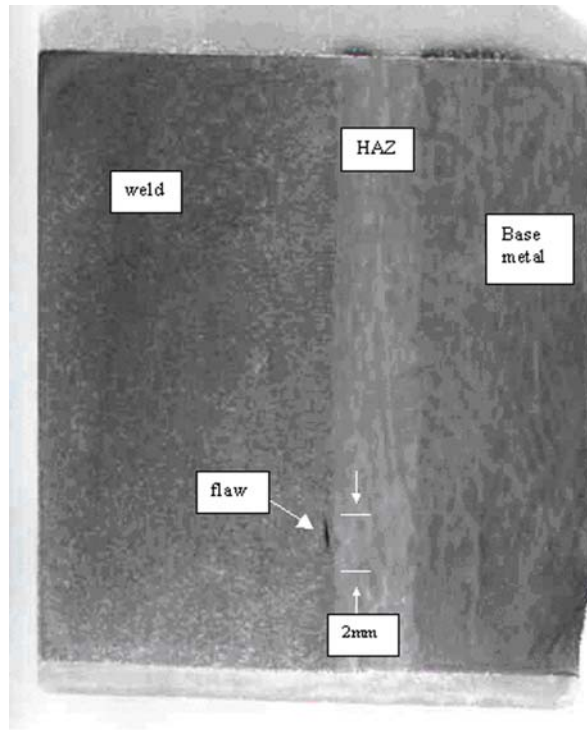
Metallograph of Flaw in the Fusion Zone of a Weld with the Base Metal
